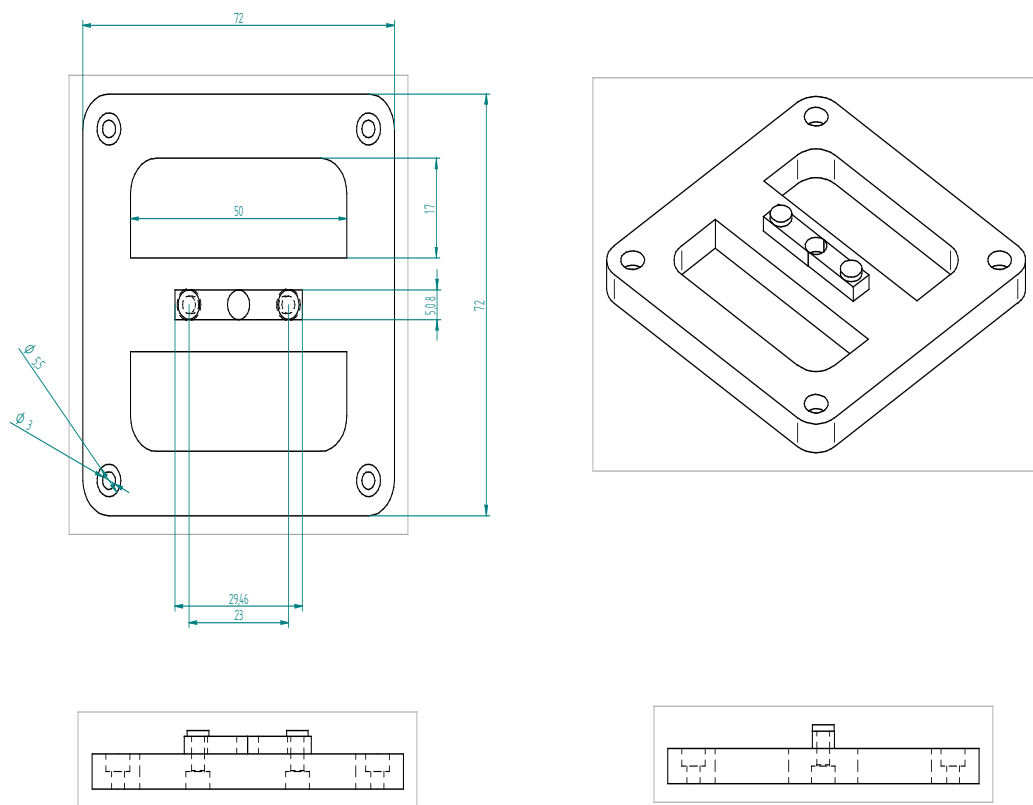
Design of a fixture for holding the cylindrical sample holder upon the X and Y axes Nanostager bought from PI®
